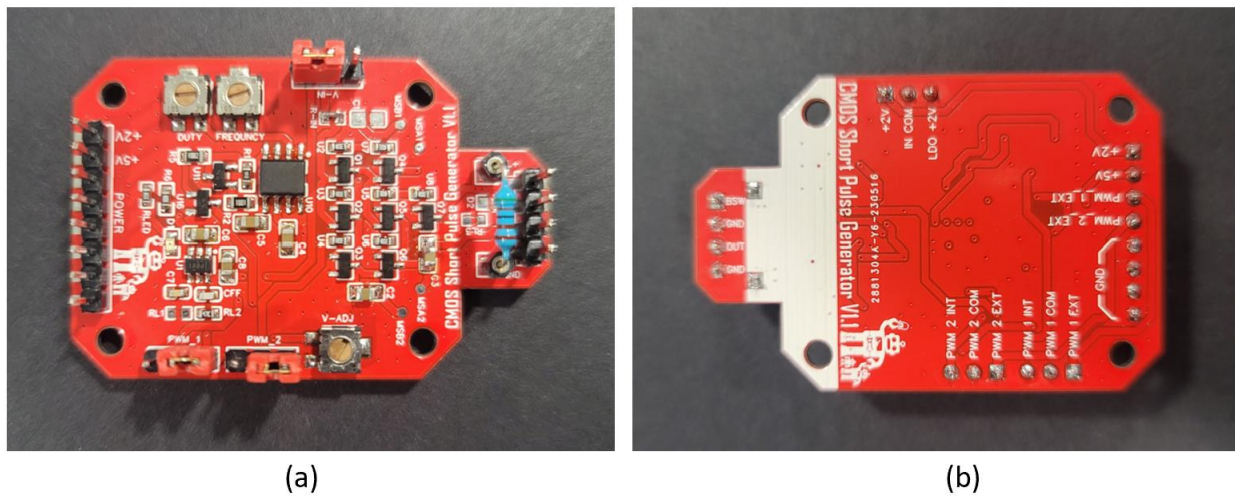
8 Completed PCB Prototype of the Short Pulse Generator Circuit, Including Top (a) and Bottom (b) Layers.
